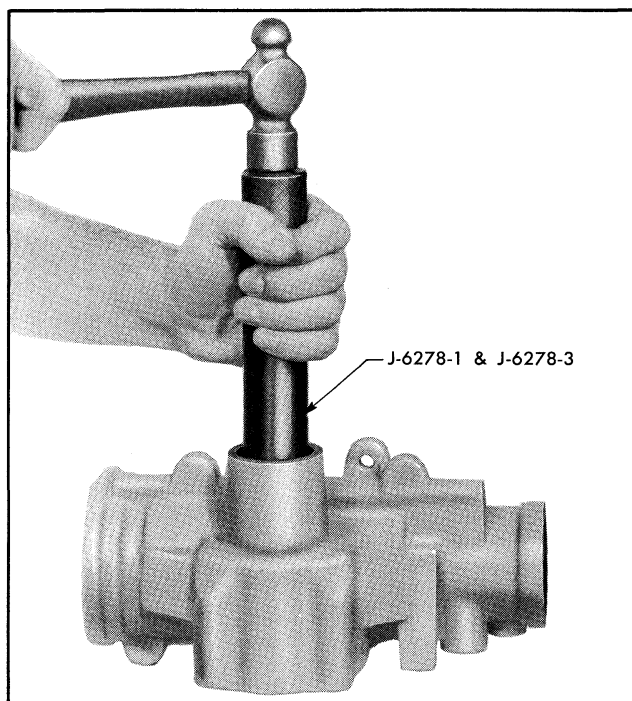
A-17 Removing Pitman Shaft Needle Bearing
